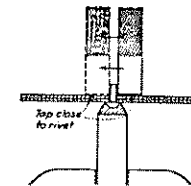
"DRAWING UP" WITH A FLAT HAND SET
